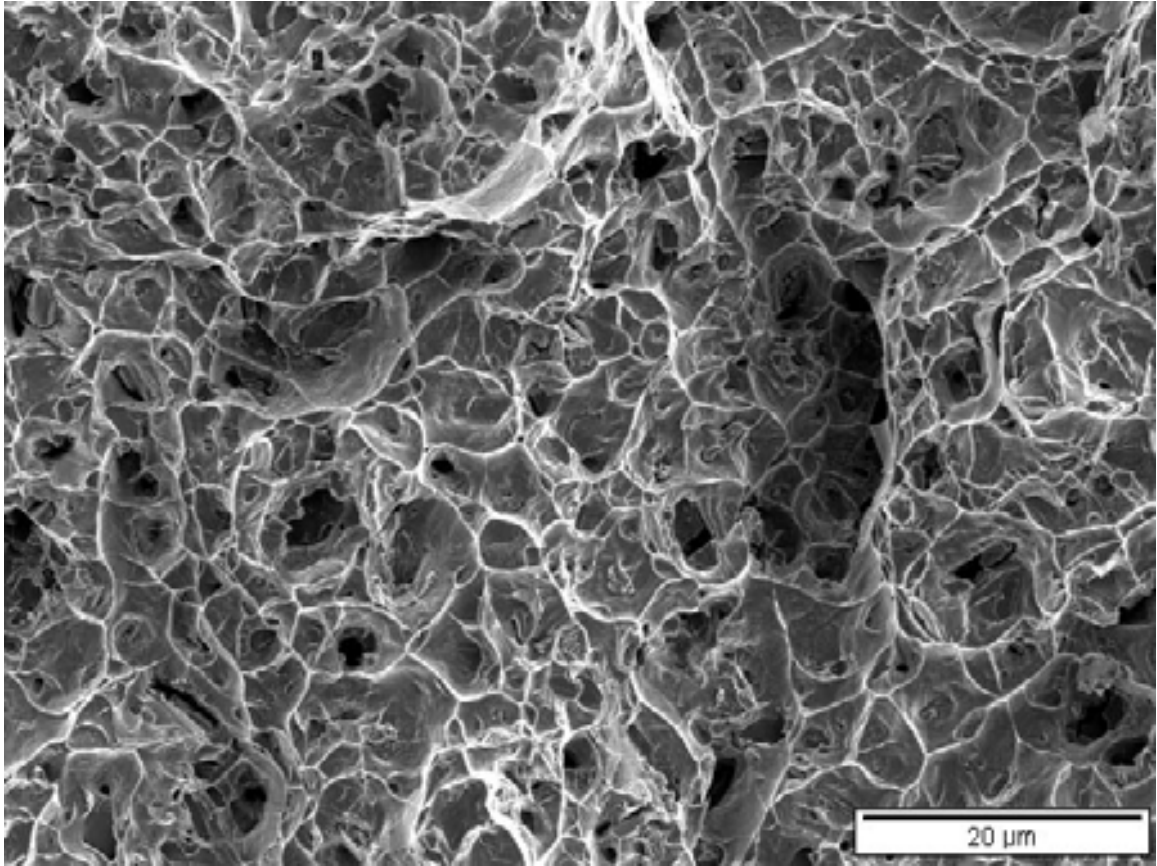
Fracture surface of extruded Ti-6Al-4V-1B modified alloy showing predominantly ductile fracture behavior of the Ti-6Al-4V matrix.
